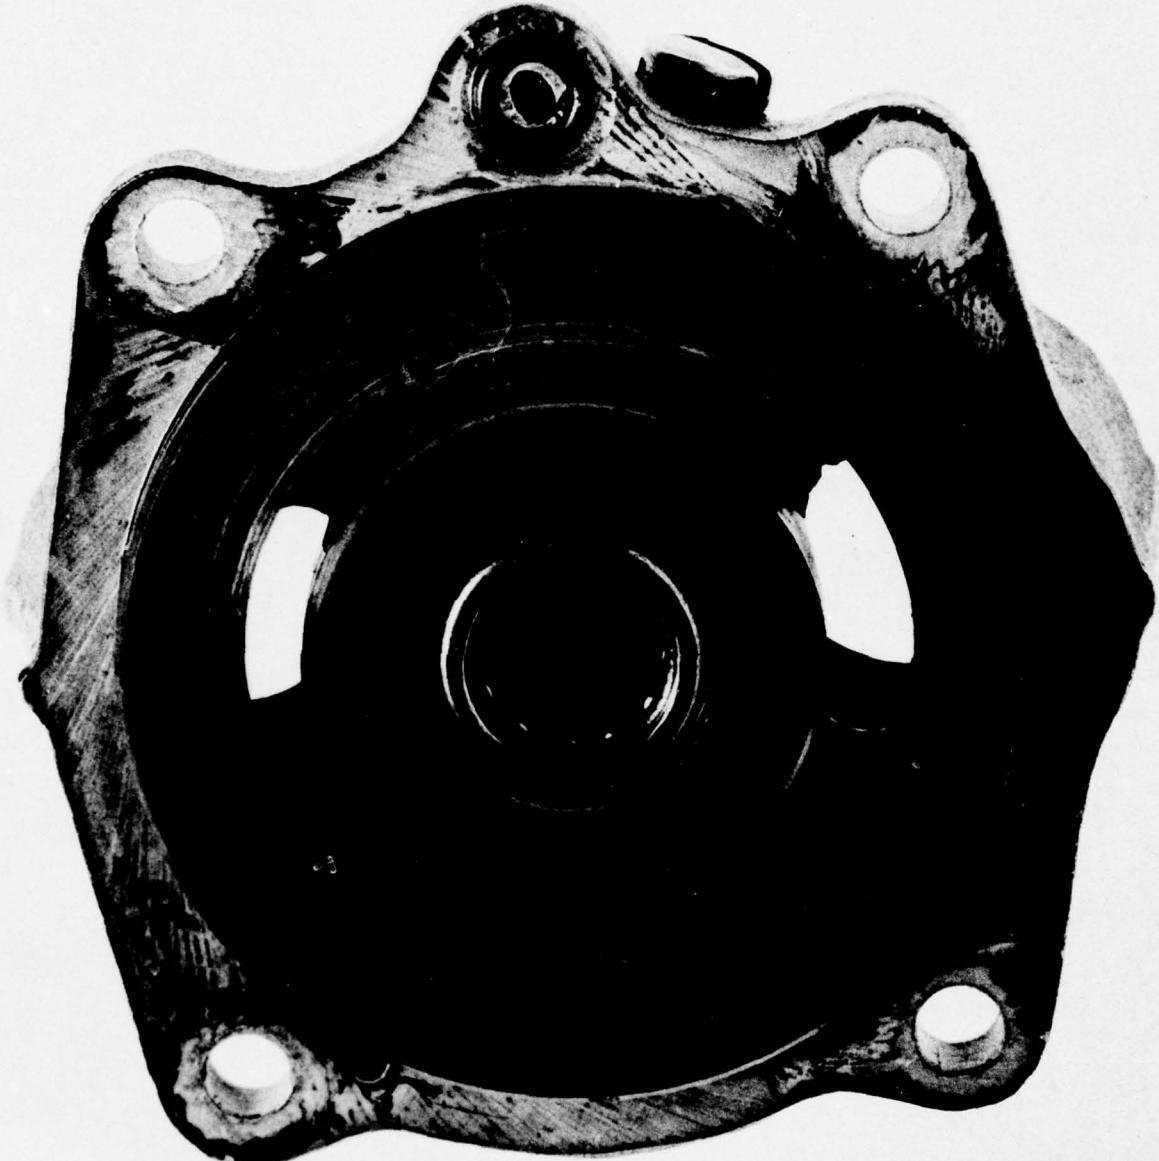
Pump Valve Plate with Needle Bearing After Test
